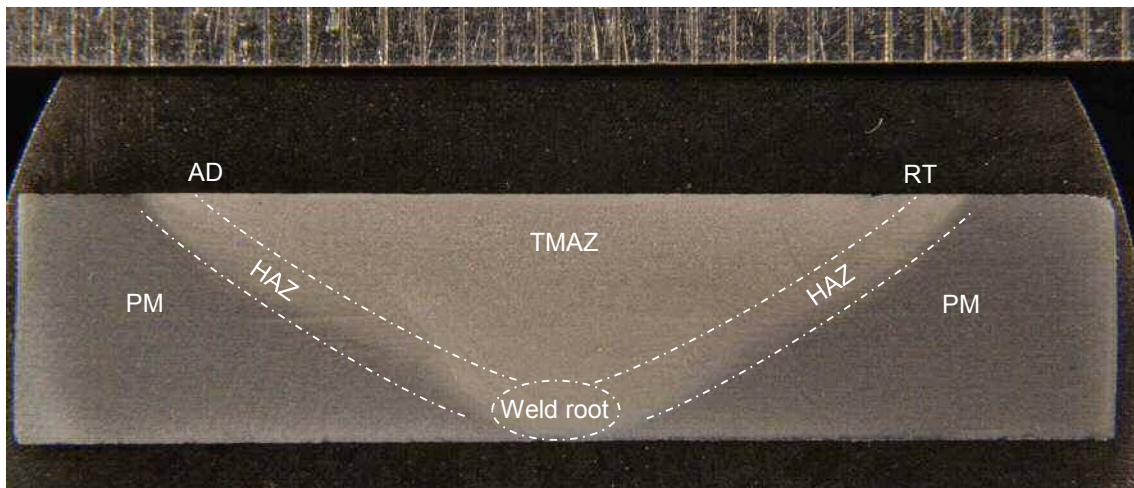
A typical macrograph of the friction stir weld region.
